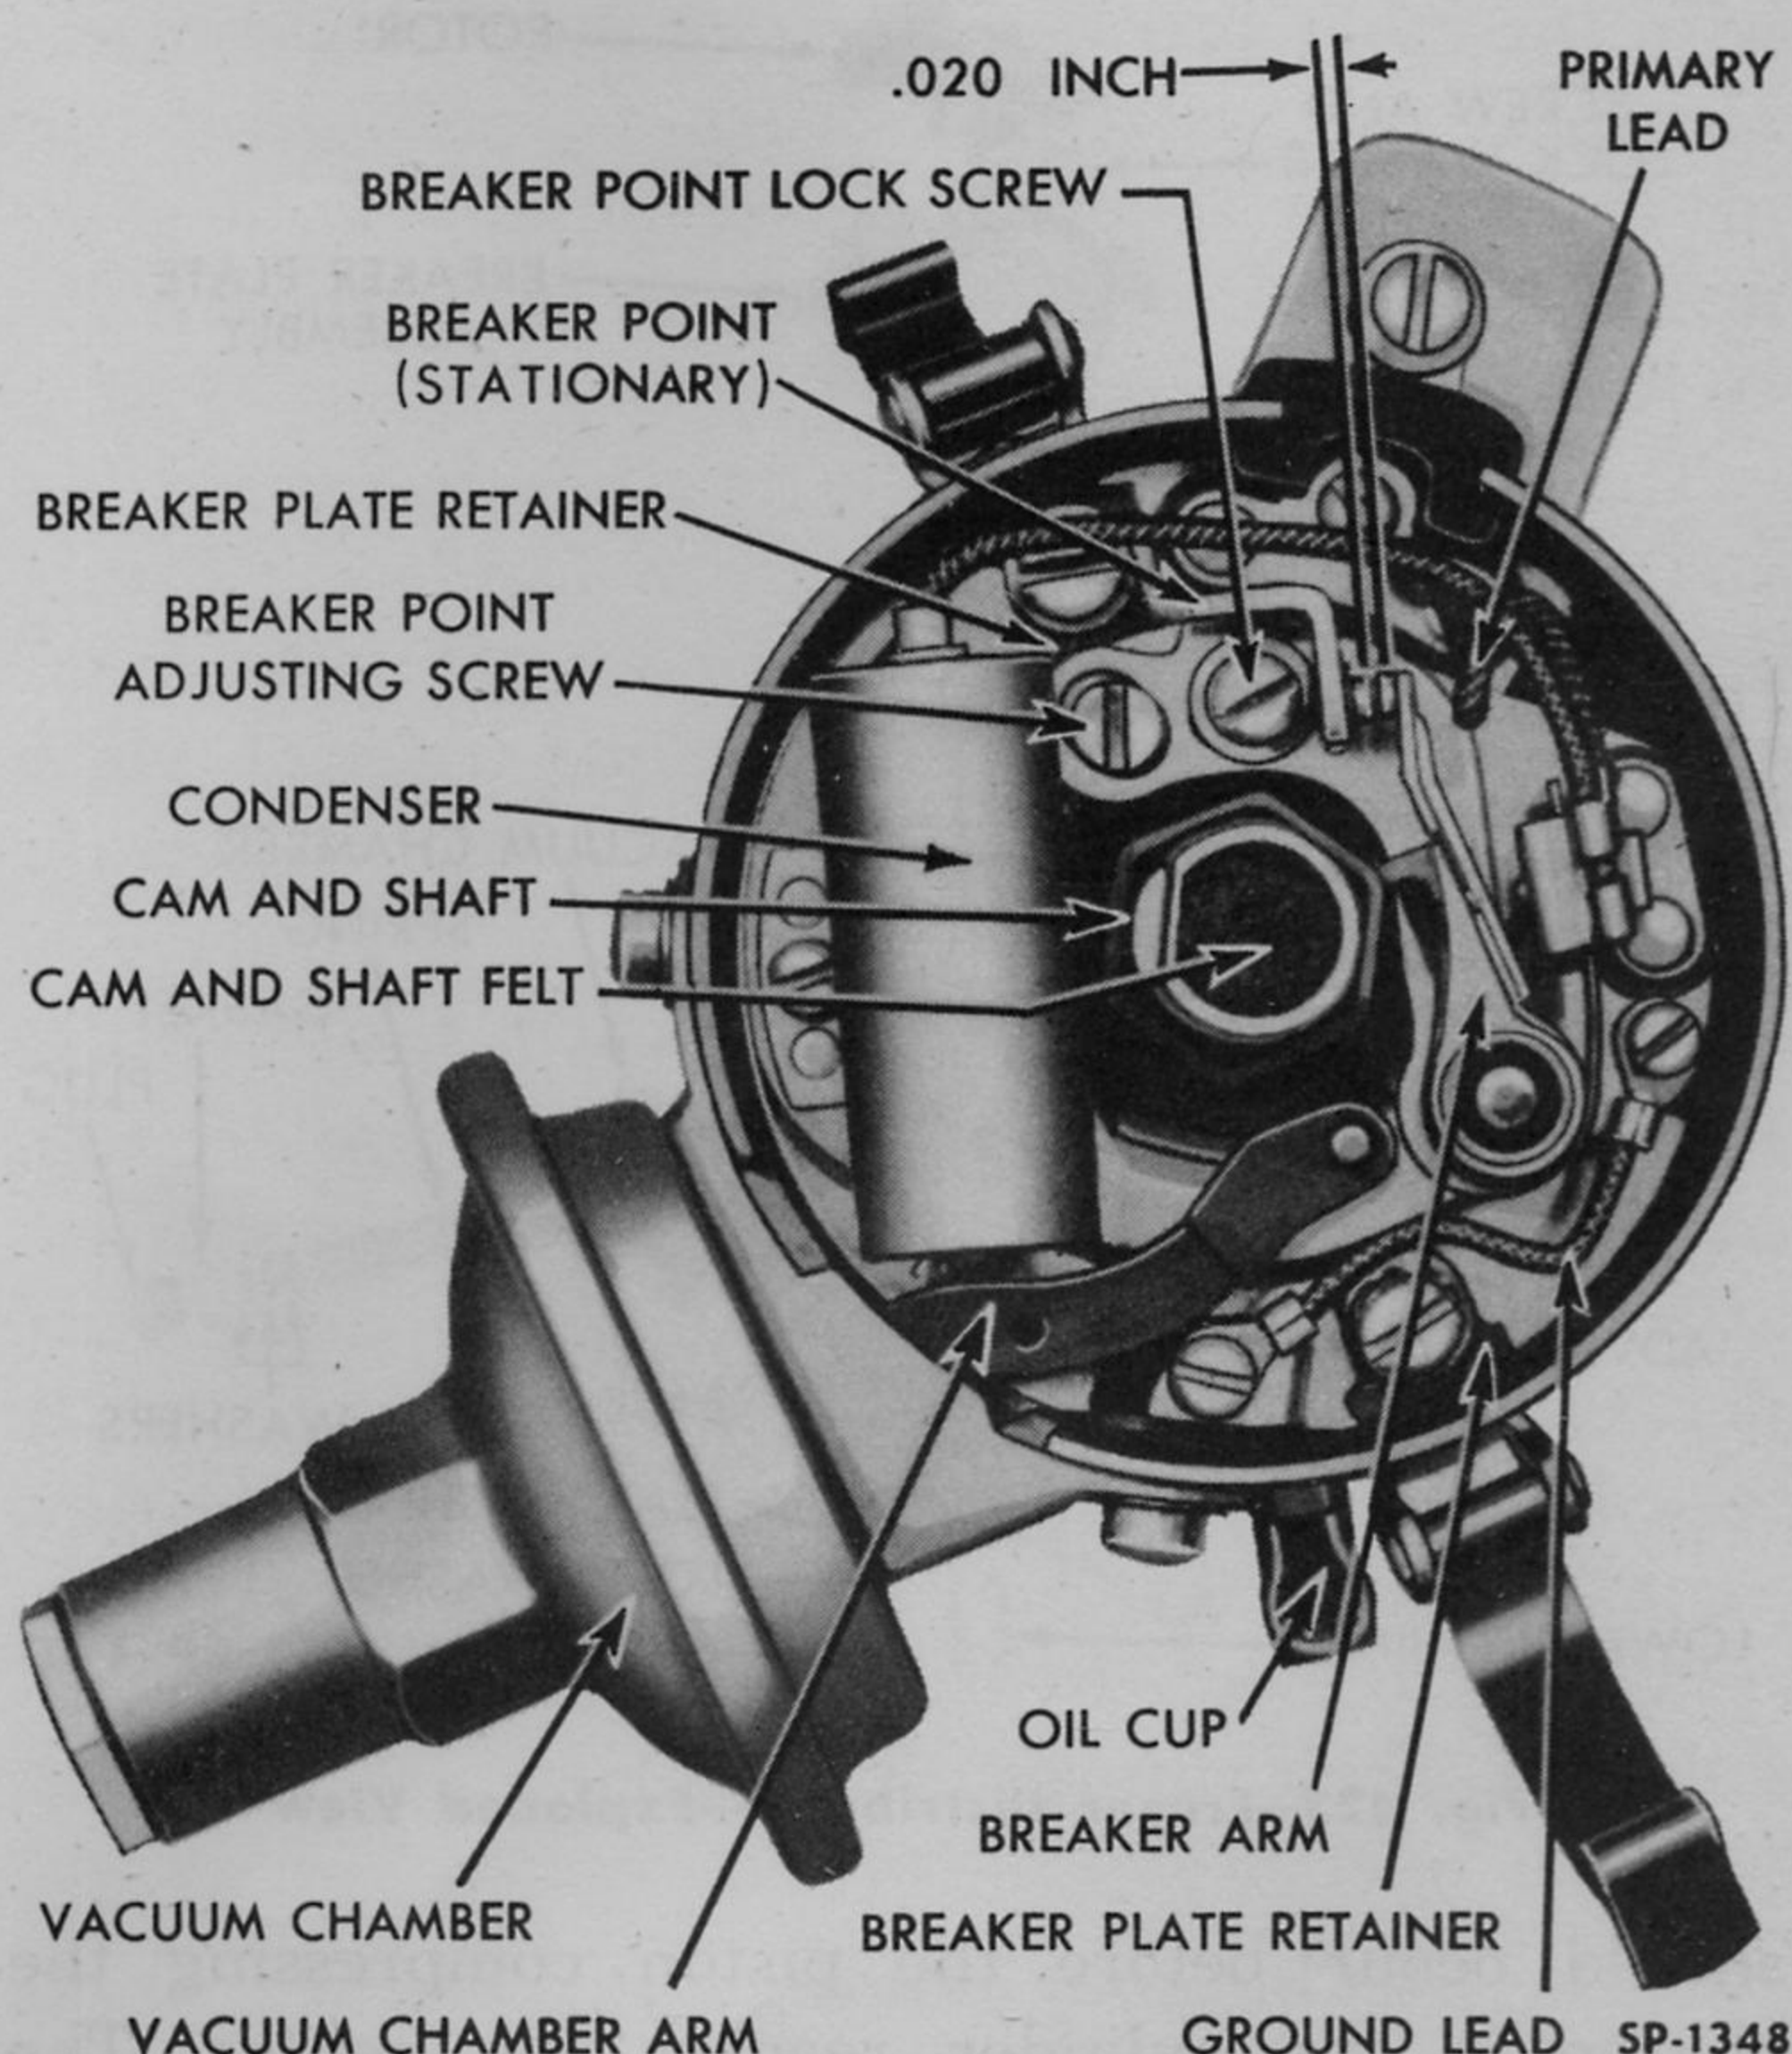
Frazer Distributor—Cap and Rotor Removed
